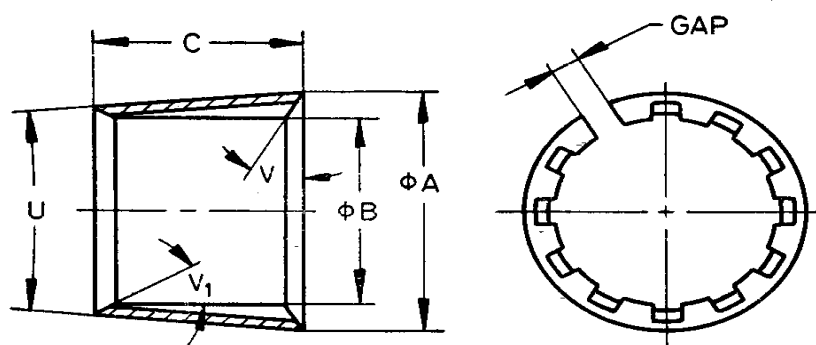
'WG' DESIGN SINGLE TUBE CORE BARREL — BEVEL WALL CORE BIT
